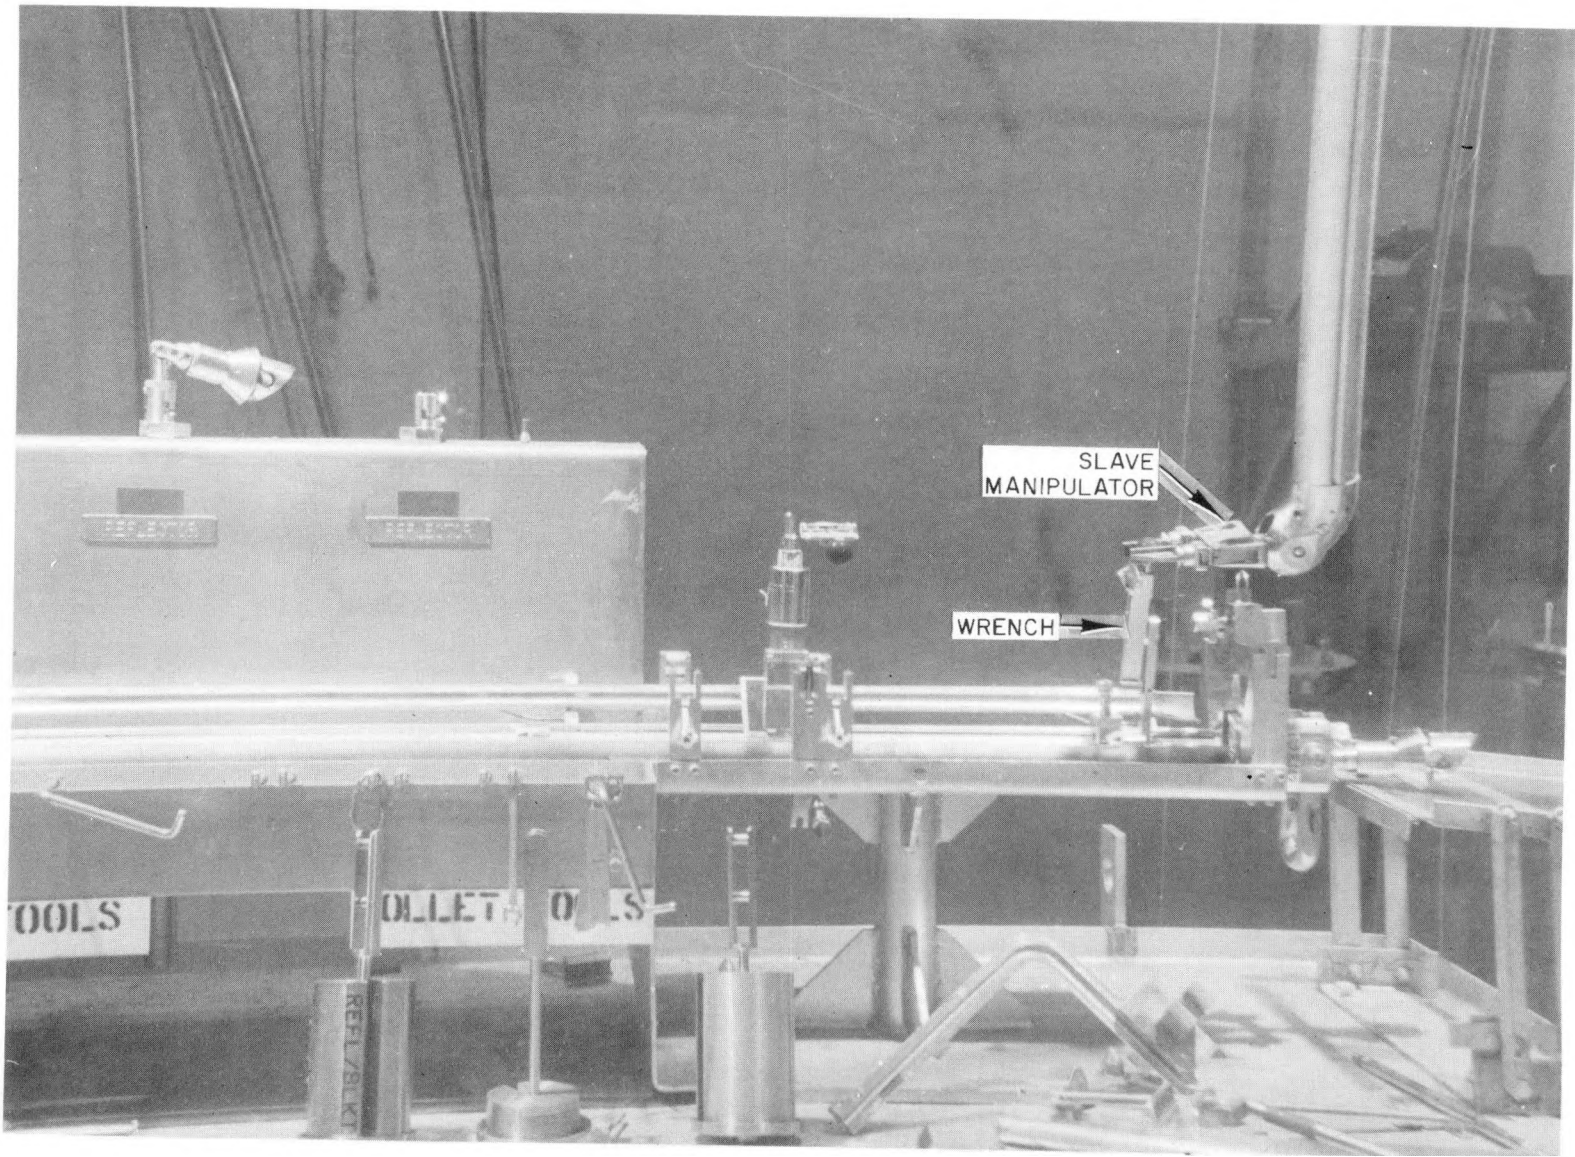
Installation of LWBR Rod Examination Gage Collet on Rod
